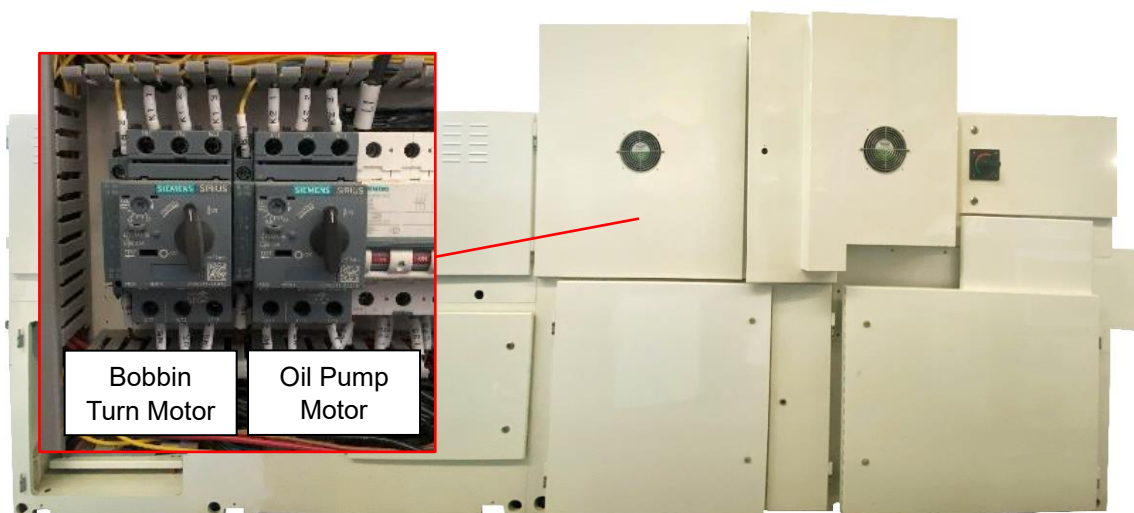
Error Bobbin Turn Motor is Overload & Oil Pump Motor is Overload
